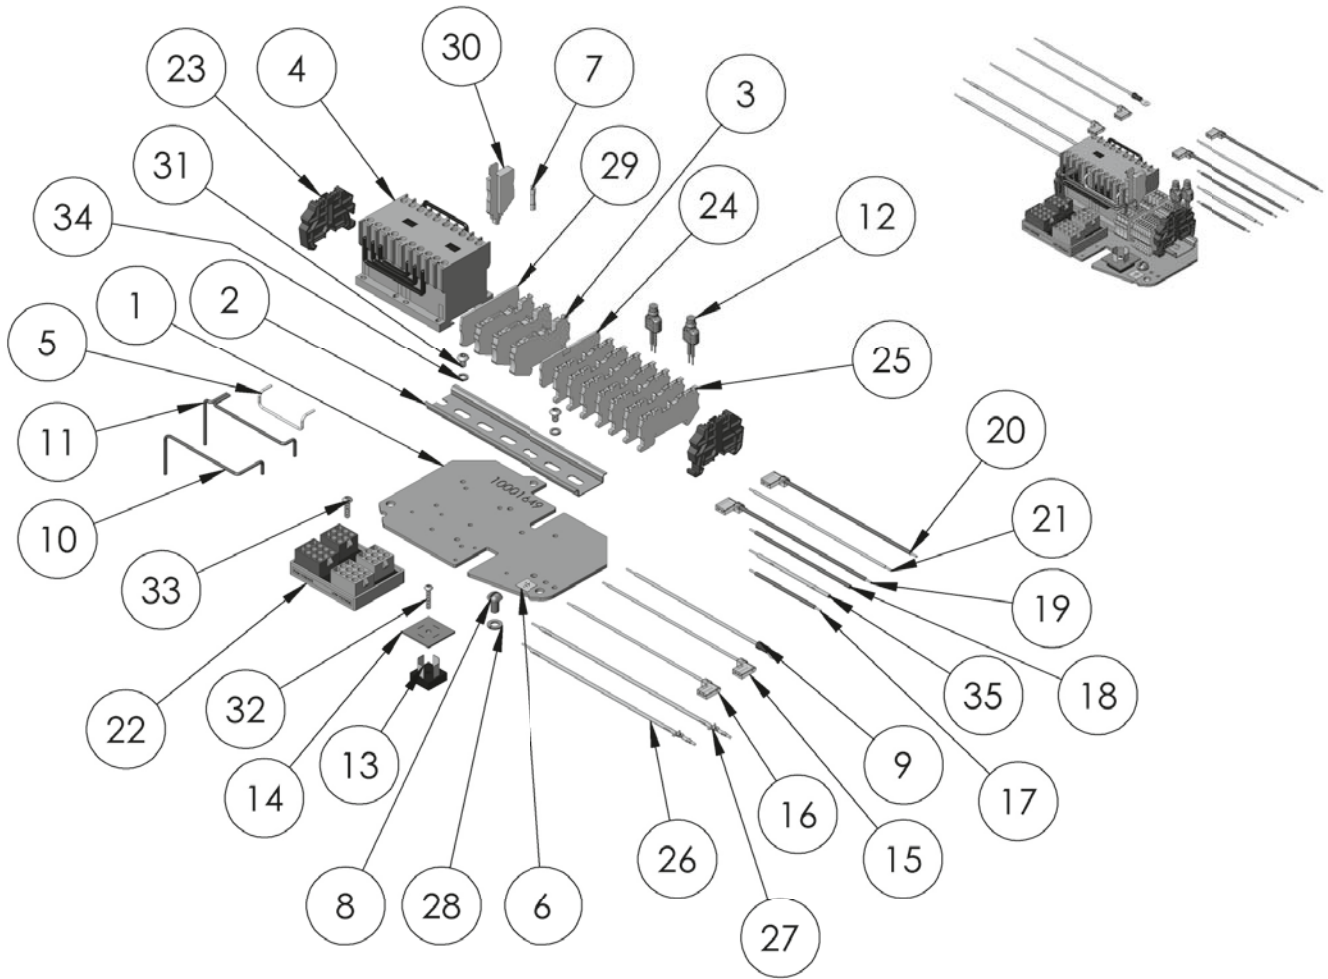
CONTACTOR PLATE ASSEMBLY FOR USE WITH DC BRAKE
